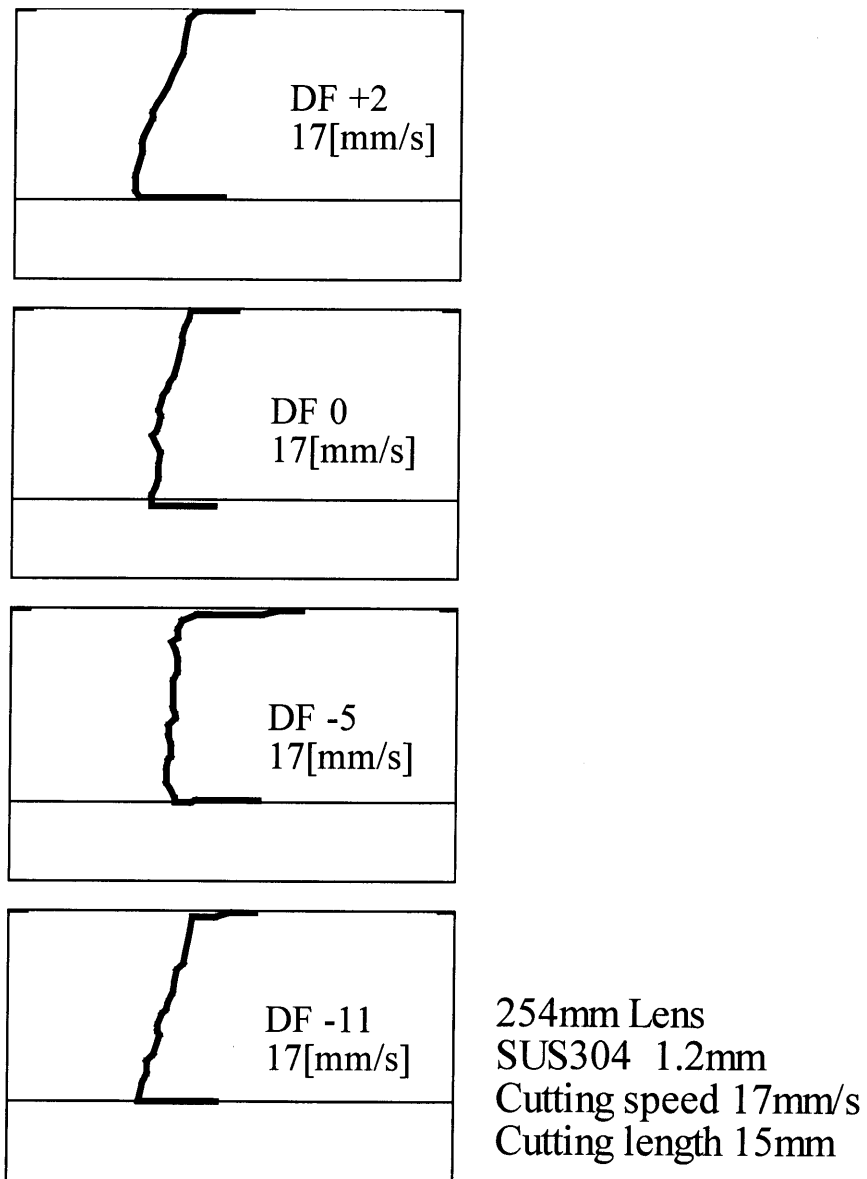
Shape of dragline at 15mm from piercing point
